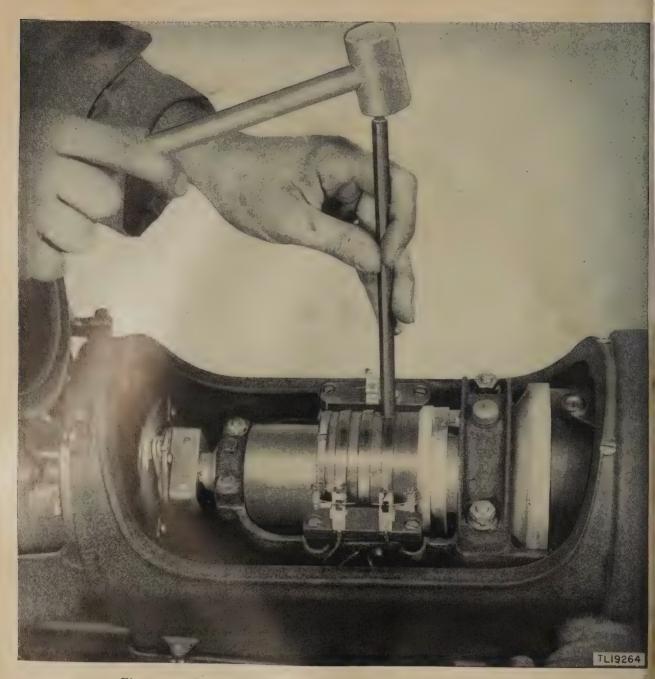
Bearing Indicator BC-1159-A, correcting slip-ring eccentricity.
